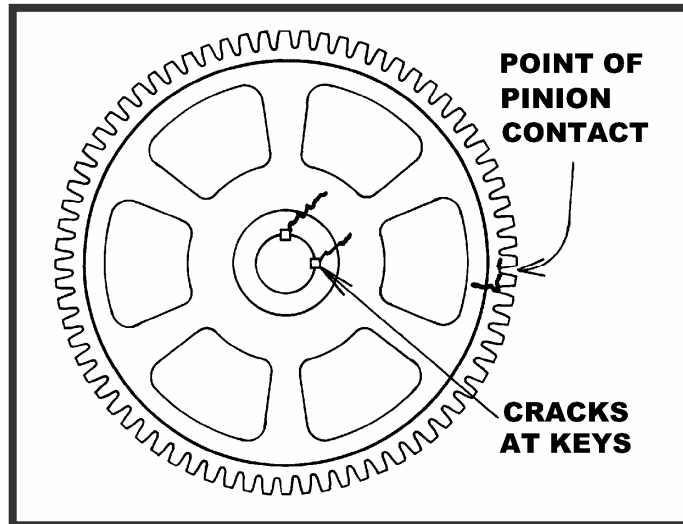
Some stress points subject to wear and crack formation on large driven gears.
